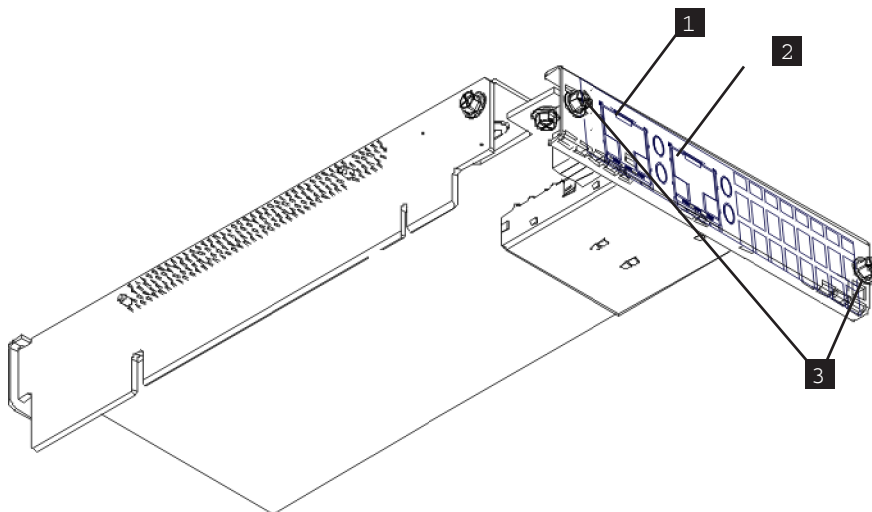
2145-CG8 10 Gbps Ethernet riser-card assembly with cutaway view of back rail
